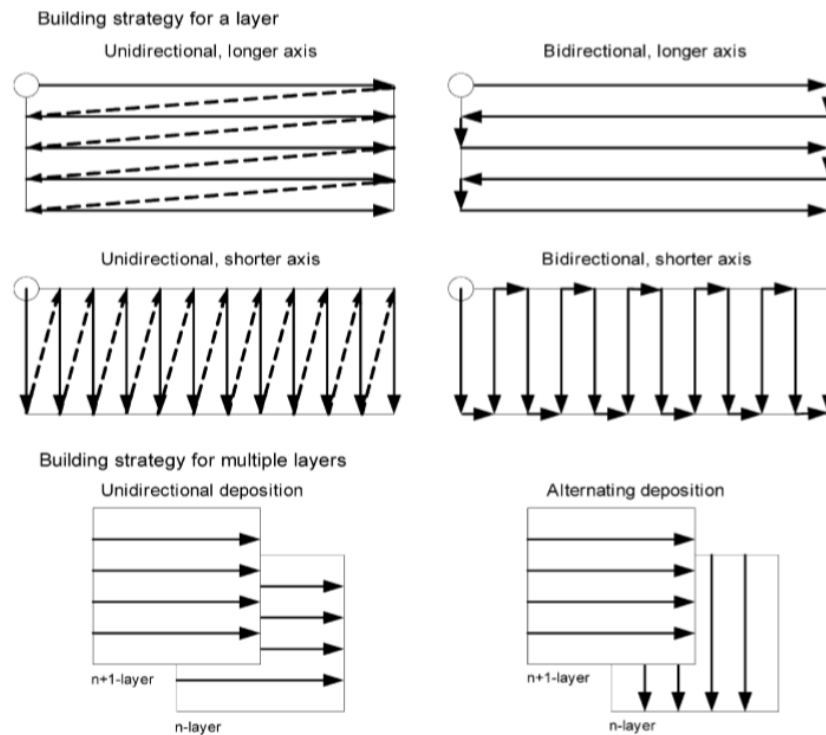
Deposition Geometries for 3D Welding [8]
